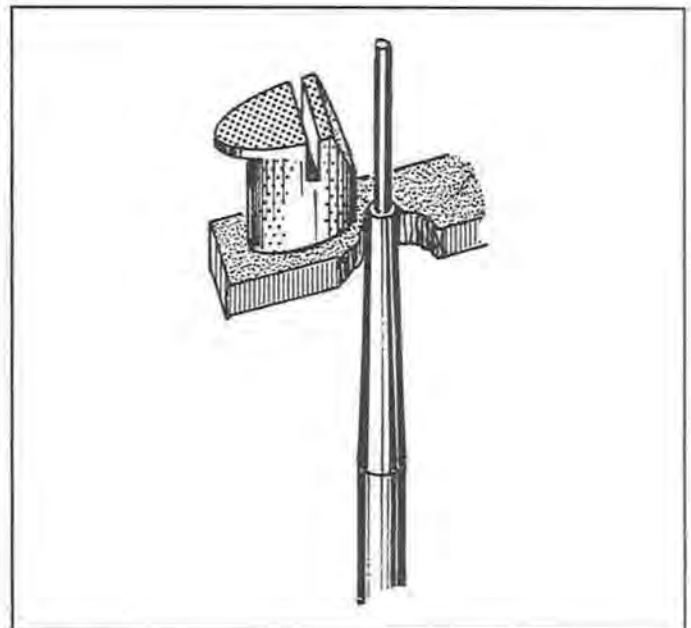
Only bottom part of the pin to remain in pinhole should be tapered to securely fasten it.
